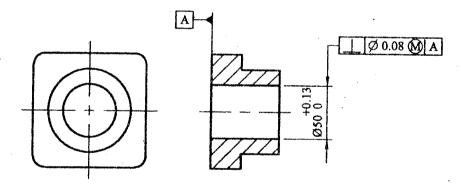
(a) - Perpendicularity tolerance of a hole
